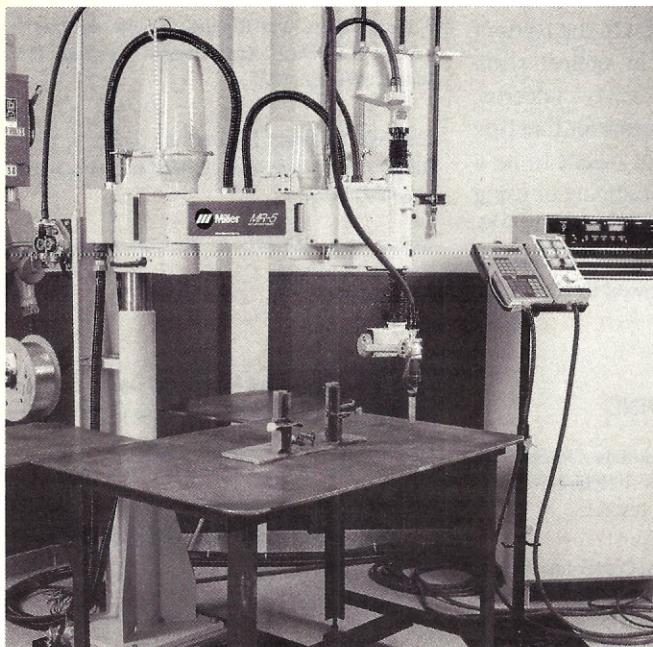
The MR-5 horizontally articulated robot is specifically designed to weld small pieces.
